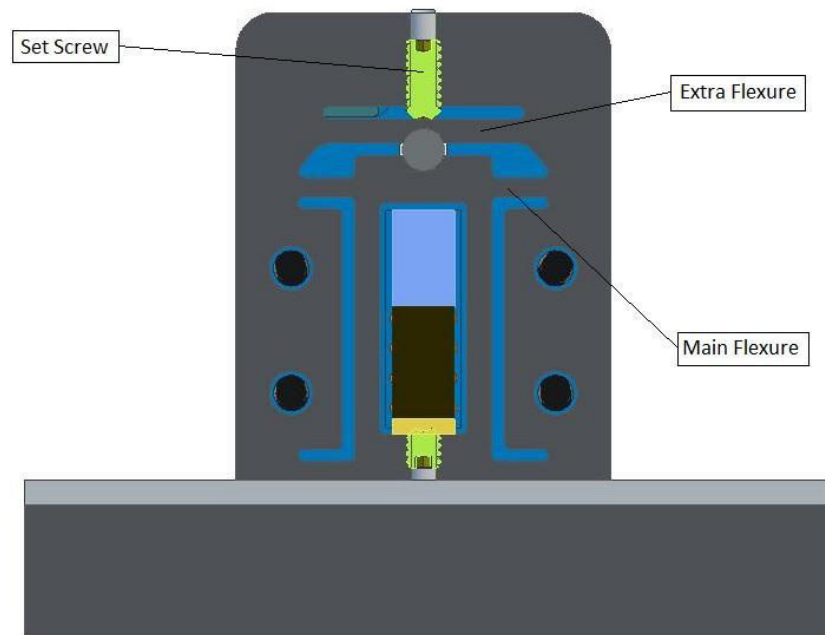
Fine adjustment of the component misalignment using set screw & flexure
